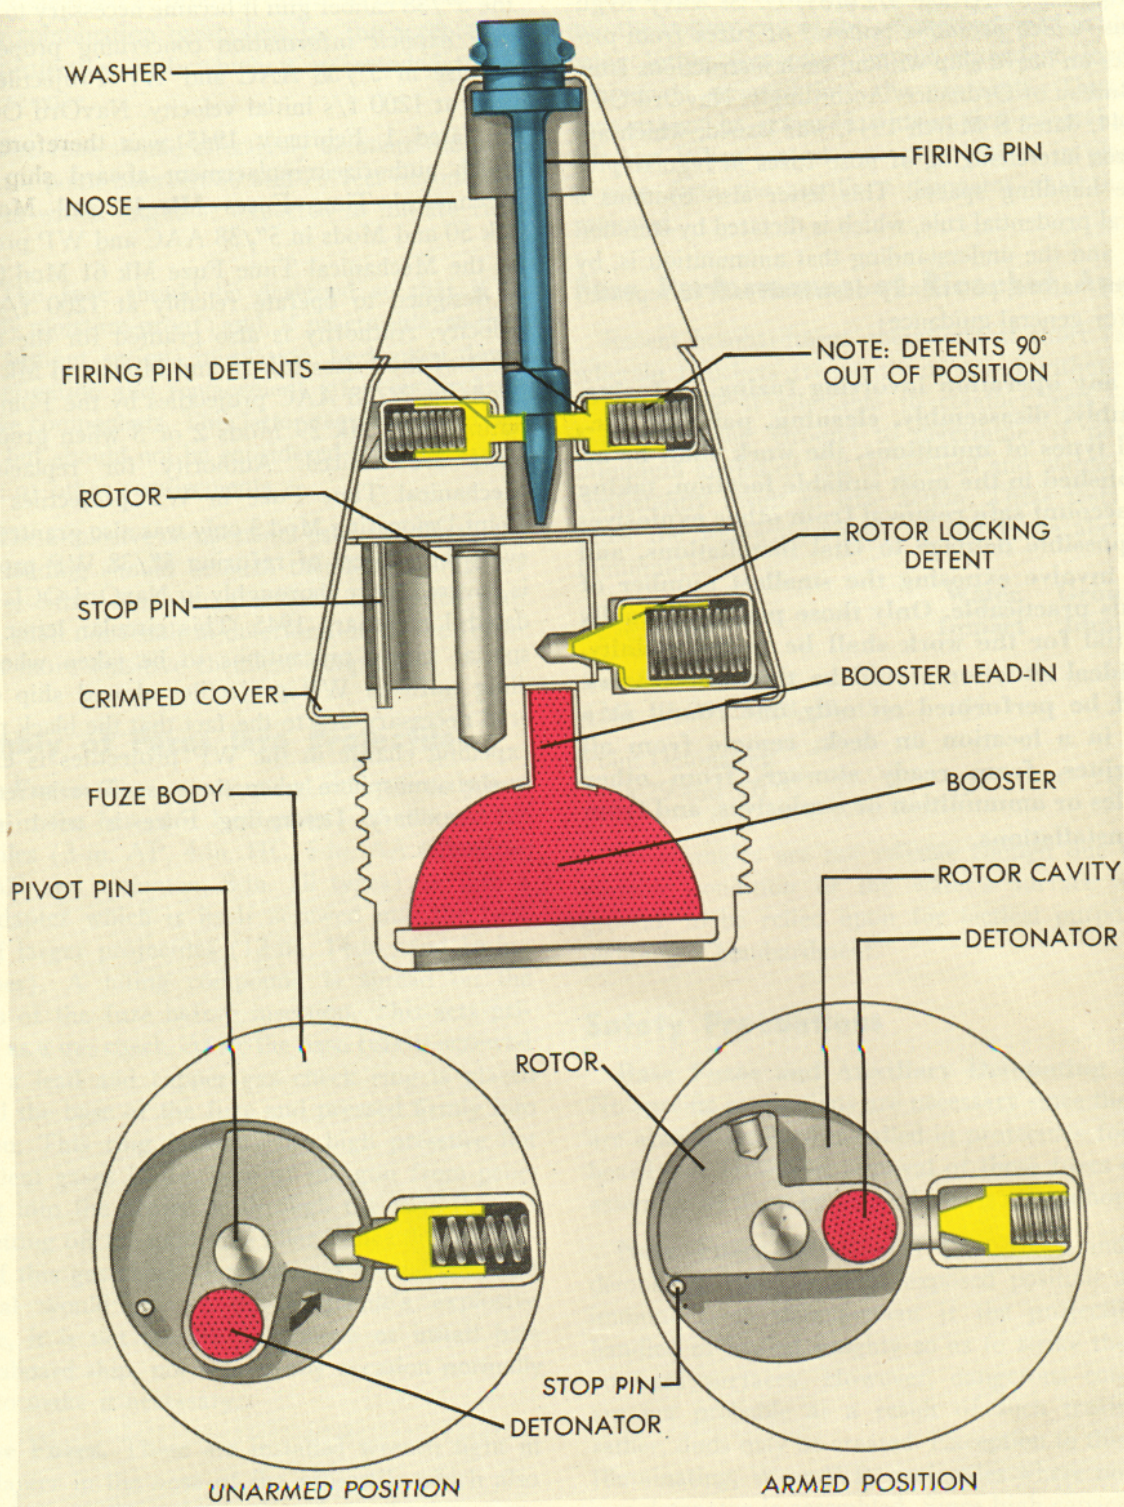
Point Detonating Fuze Mk 12 Mods 2 and 3—Sectional View
